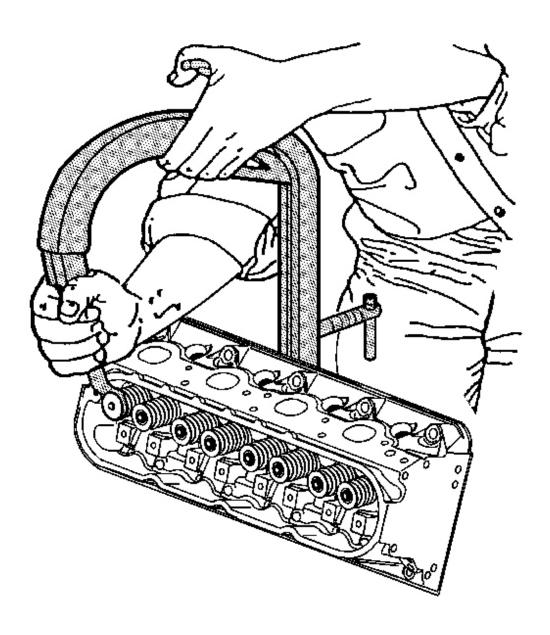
Compressing Valve Spring Using Courtesy of GENERAL MOTORS CORP.
